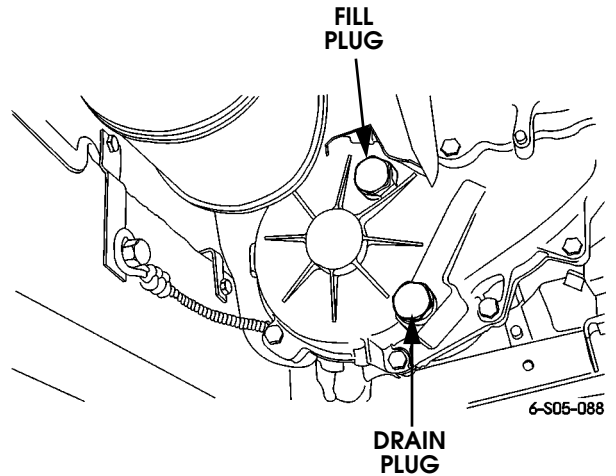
Transfer Case Drain and Fill Plug Locations
